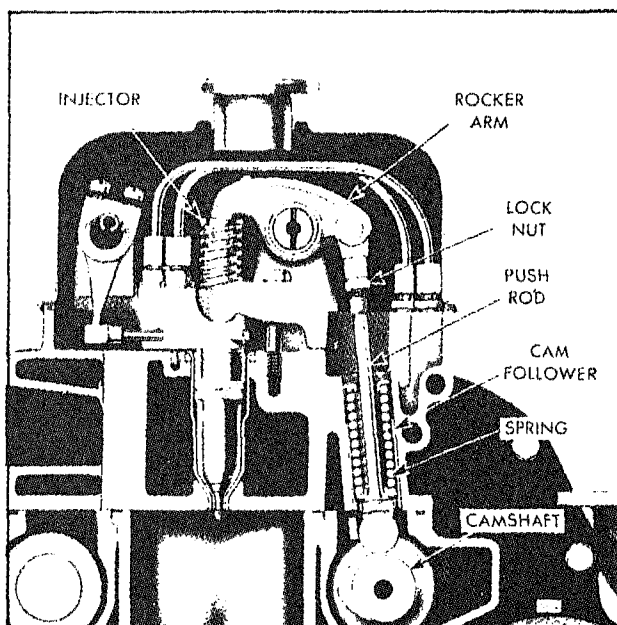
Injector Operating Mechanism (In-Line Engine Shown)
